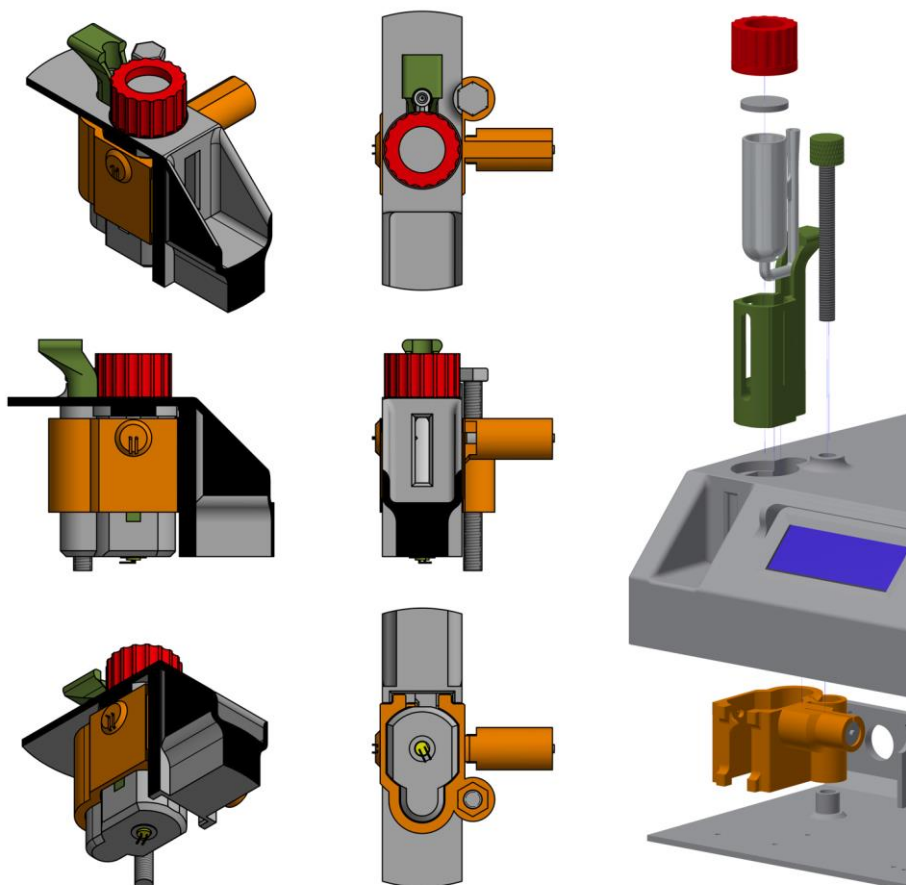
CAD views of the detection cell assembly prepared by a cut-out view from the cover assembly. The black regions represent cuts in the cover material. An exploded view of the detection cell is shown on the right.
